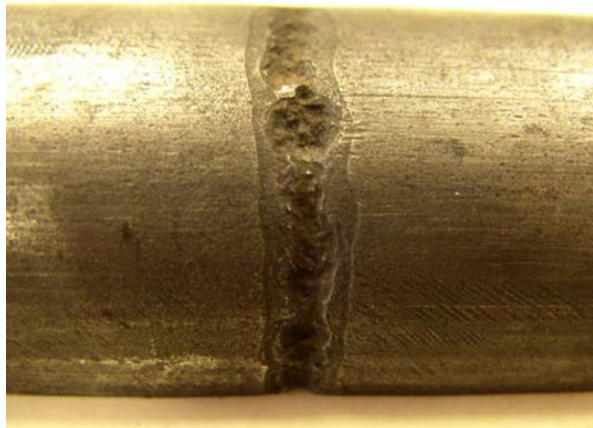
Acid Corrosion at a Butt Weld
